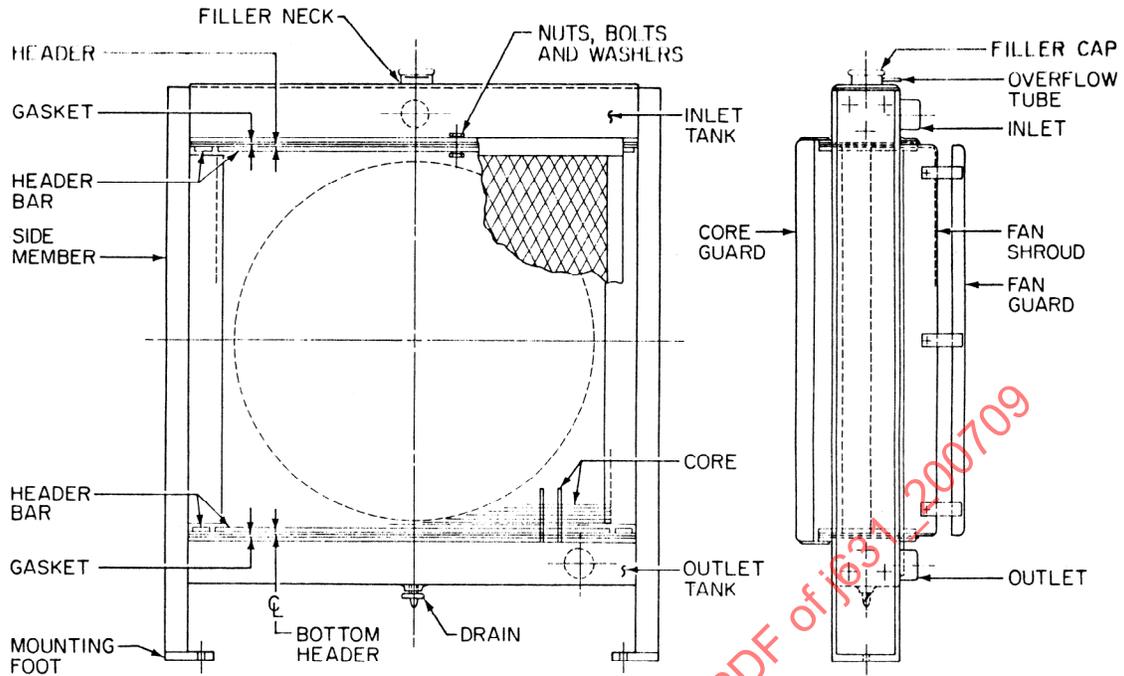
FABRICATED TYPE (ONE-PIECE CORE) RADIATOR
